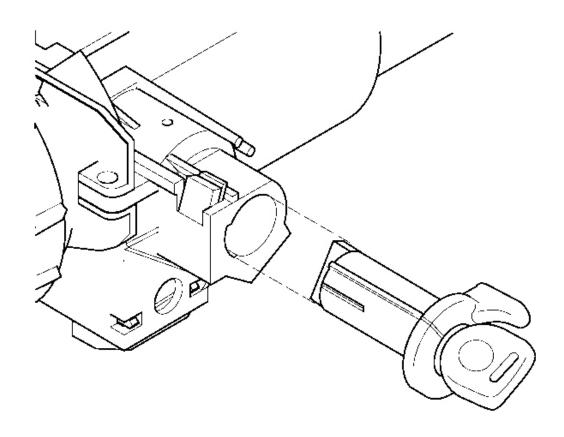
View Of Lock Cylinder At Lock Cylinder Housing Courtesy of GENERAL MOTORS CORP.
